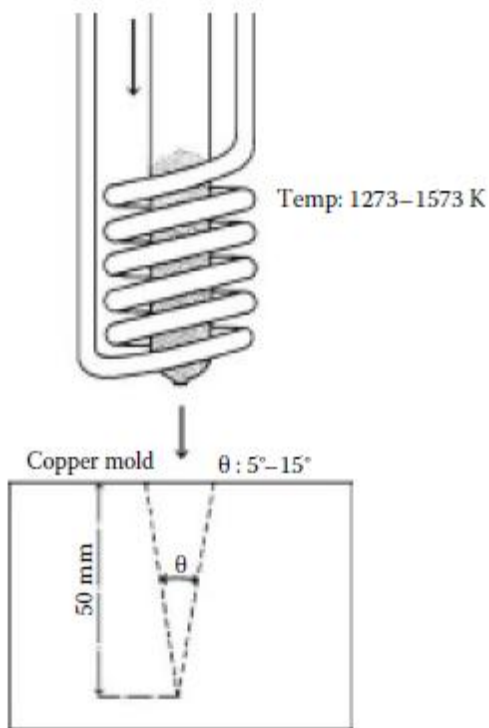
Schematic diagram of the equipment used to prepare a bulk metallic glass by copper mold wedge-casting technique
